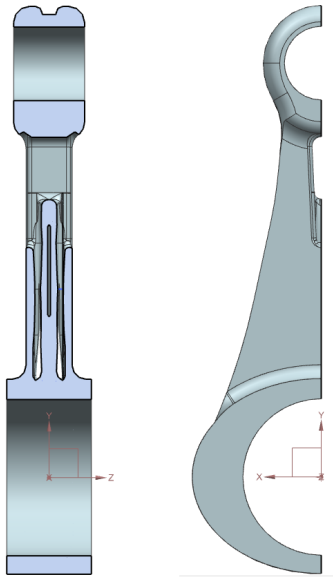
Cross-sections of 2.1 beam about X-axis; Center cut.
